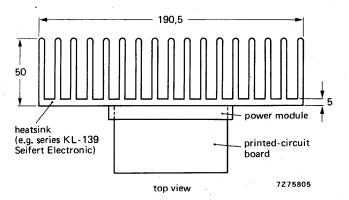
Example of a heatsink to be used for the module; dimensions in mm.
